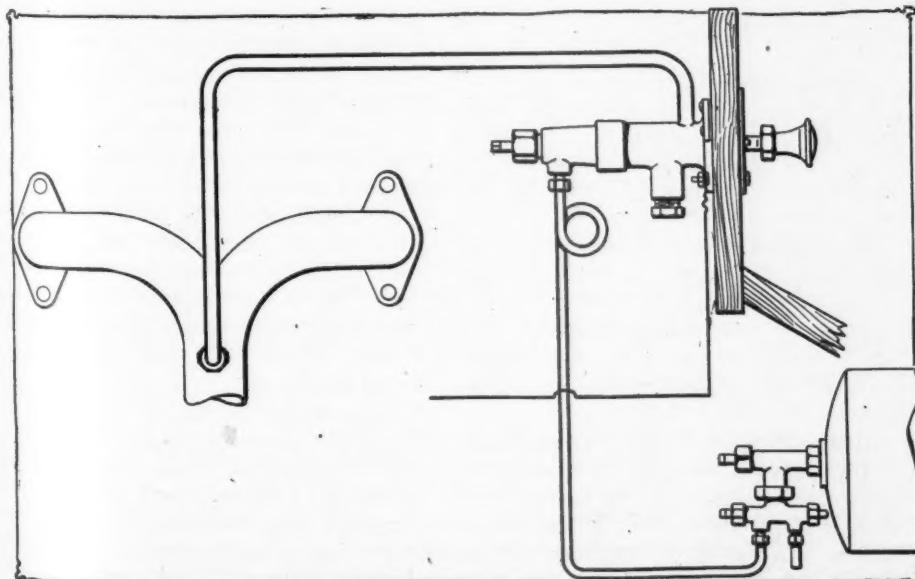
CRANKLESS ACETYLENE MANIFOLD STARTER
